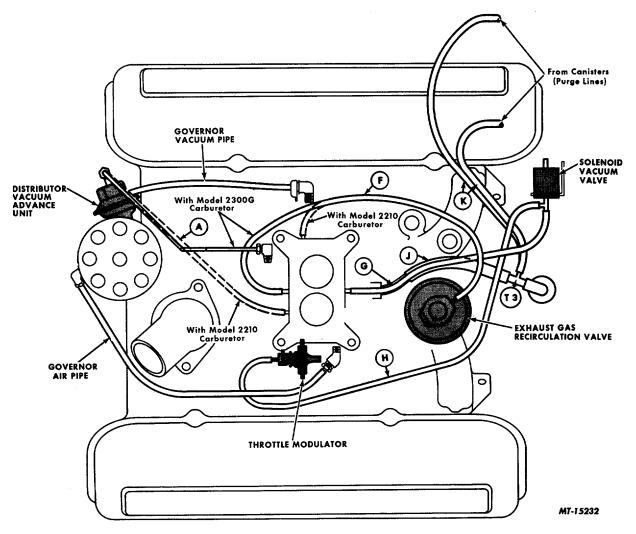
Vacuum Hose Location--For 1600 through 1800
